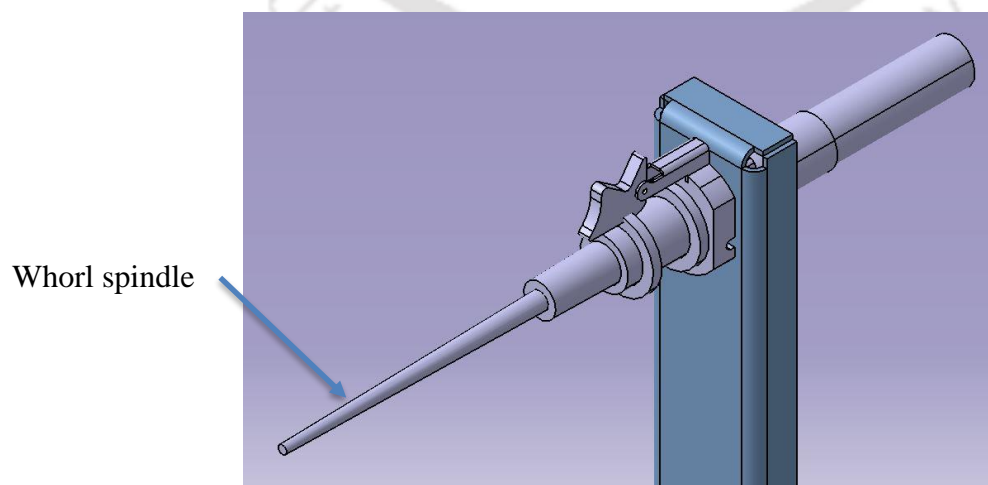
Removable whorl spindle of Winding wheel / Charkha
